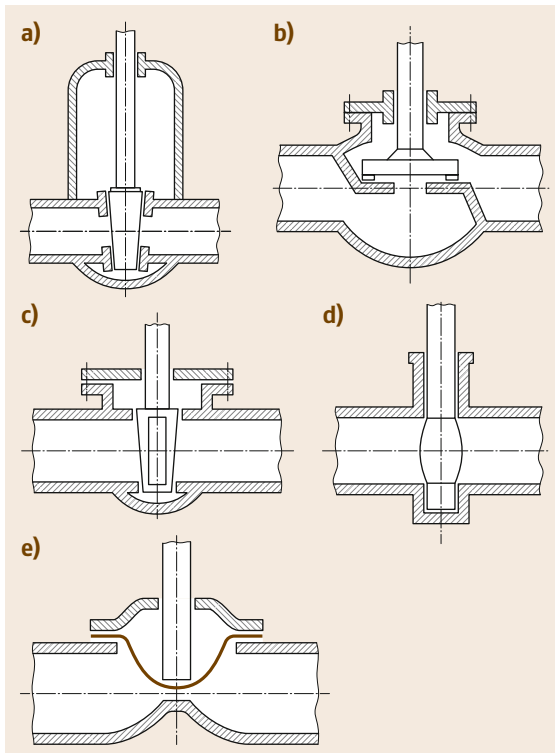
e Basic types of valves: (a) gate valve; (b) globe valve, (c) plug and ball valves, (d) butterfly valve, and (e) diaphragm valve (after [15.129])
